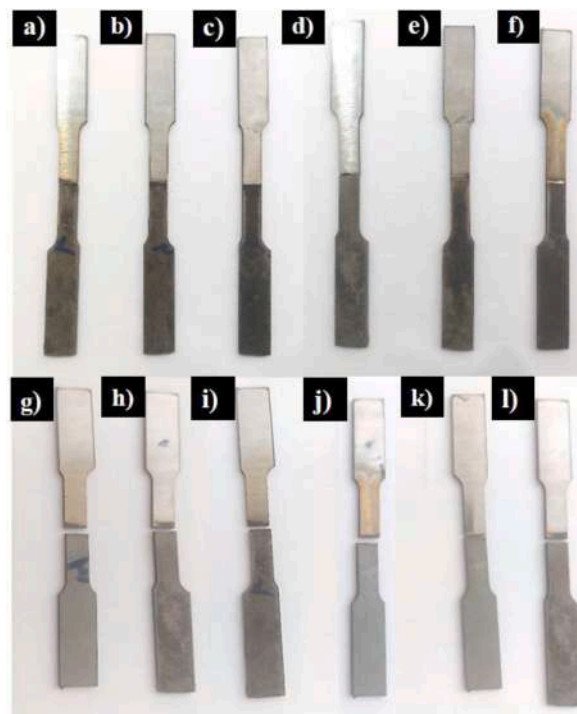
Appearance of tensile tests samples at focal length of 0 mm, welding speed 200 mm/min, for laser power of a) 300W, b) 350W, c) 400W, laser power of 400W for focal length of d) 0 mm, e) 2 mm, f) 4 mm and the fracture appearance of tensile tests samples for laser power of g) 300W, h) 350W, i) 400W, laser power of 400W for focal length of j) 0 mm, k) 2 mm, l) 4 mm.
